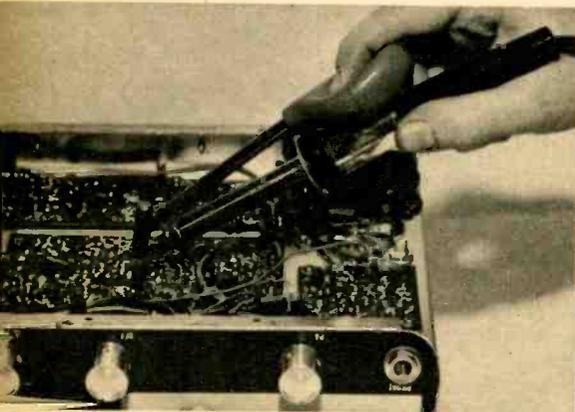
Endeco Model 300-K desoldering kit uses suction to remove solder melted by attached iron.
